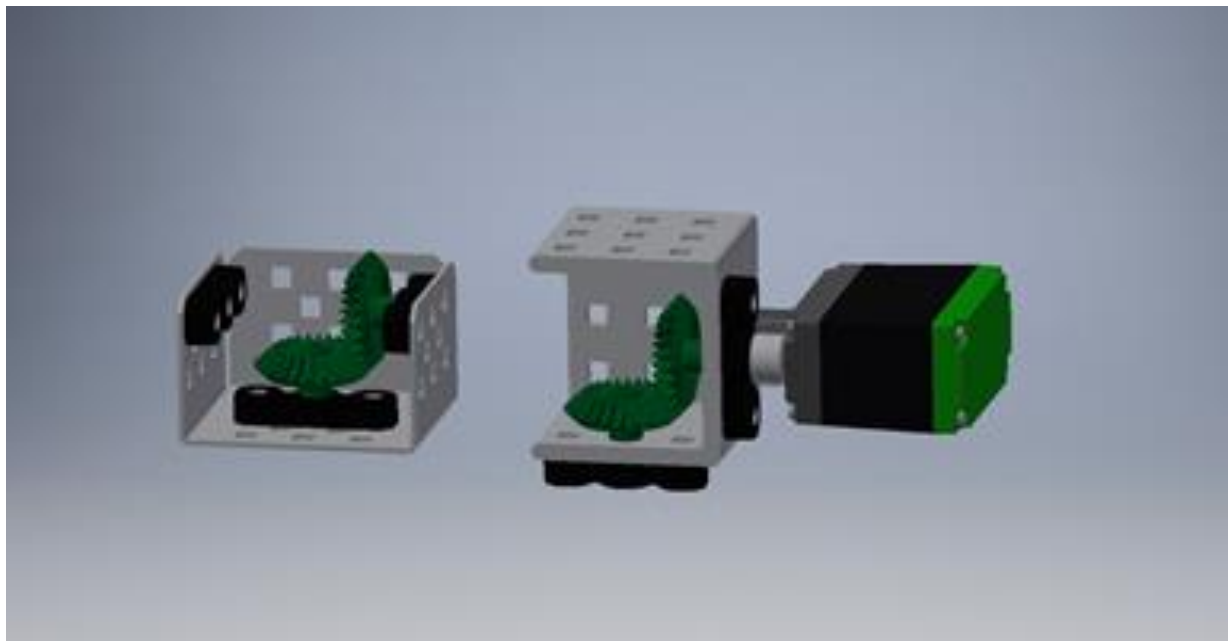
45-degree Bevel Gears in assembled in Inventor.
